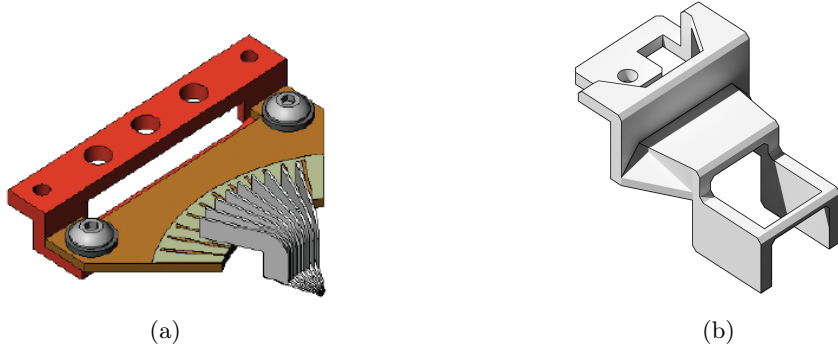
DCQ Probe Head & Cover. Probe head example (a). Note, our probes host 4 needles instead of 9. A custom developed, 3D printed probe-head cover (b) to reduce the chance of damaging the probe needles during maintenance.
